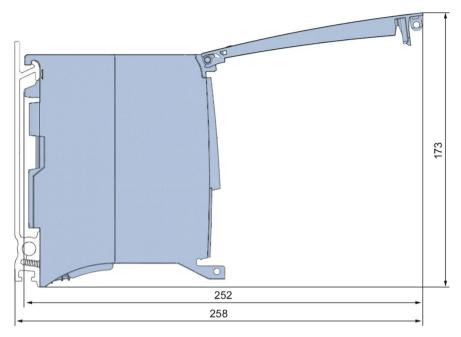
Dimension drawing of the IM 155-5 PN HF interface module, side view with open front cover
